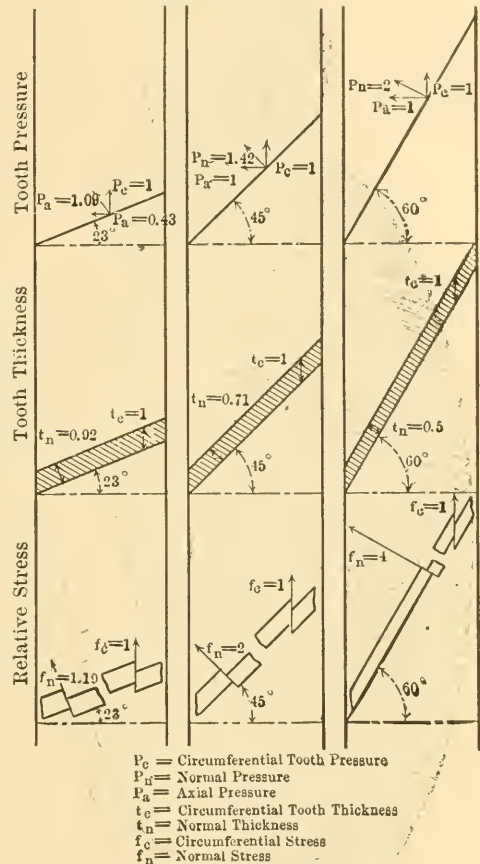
COMPARISON OF TOOTH PRESSURE, THICKNESS, AND RELATIVE STRESS FOR THE TOOTH ANGLES OF DOUBLE HELICAL GEARS.
